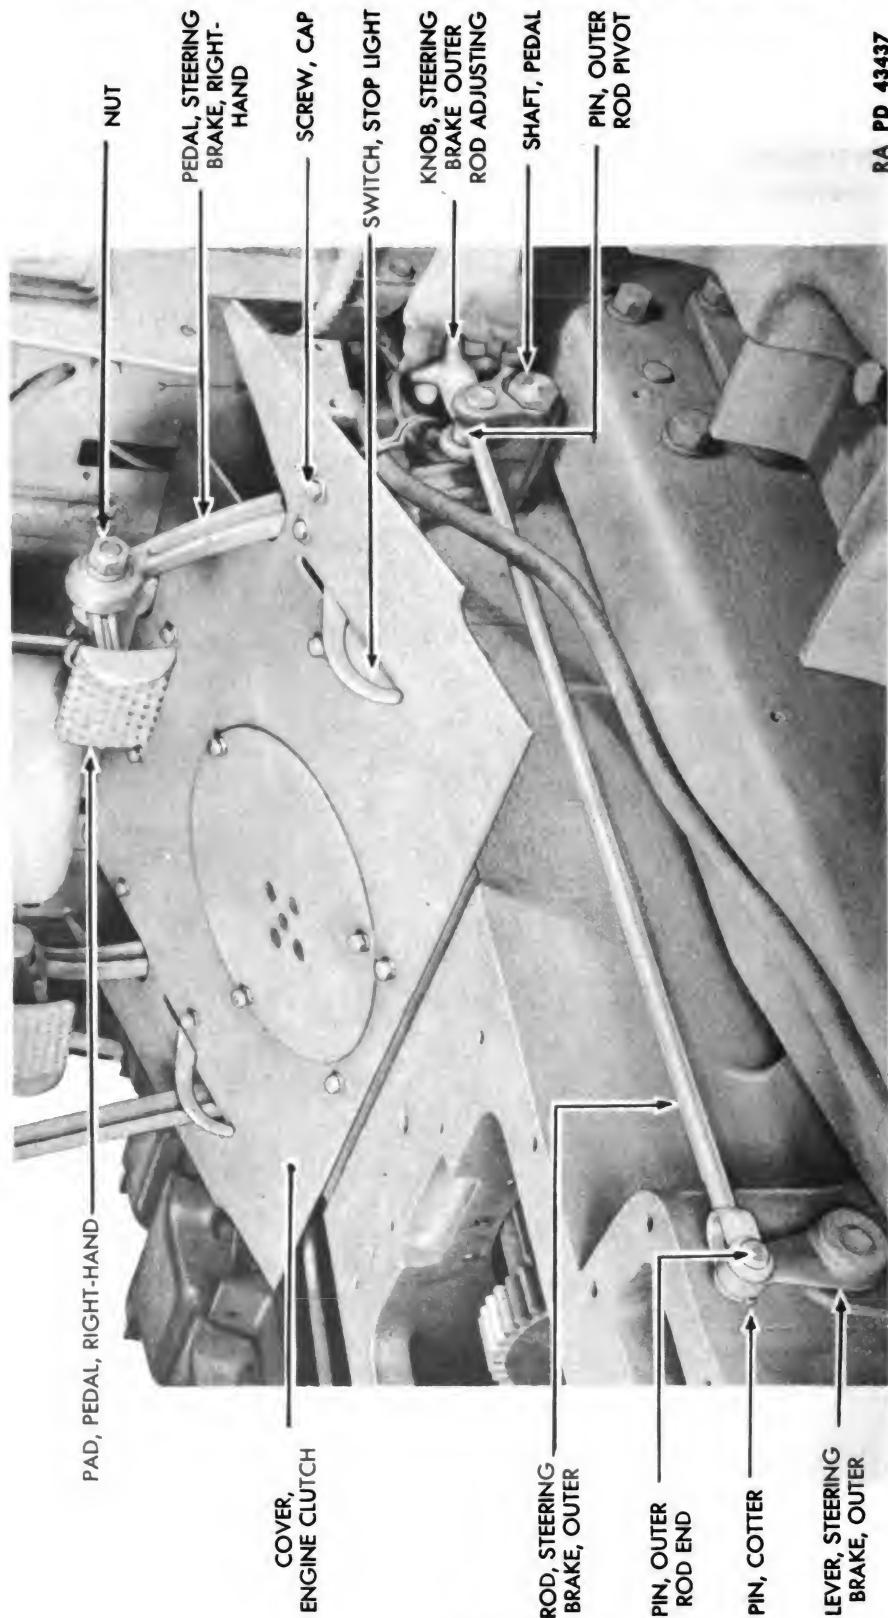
Steering Brake Outer Rod Adjusting Knob Removal
